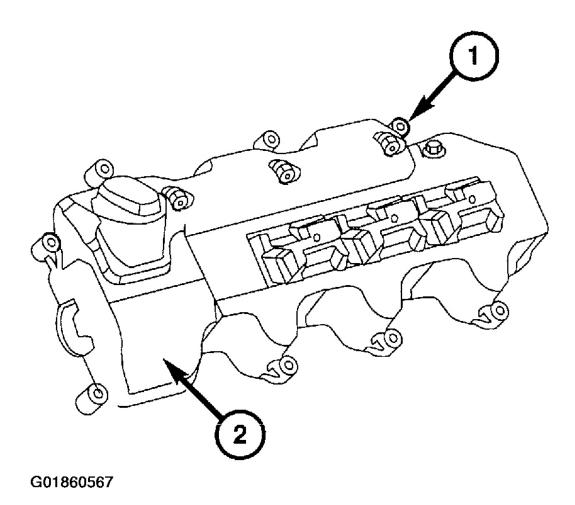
Installing Cylinder Head Covers Courtesy of DAIMLERCHRYSLER CORP.
